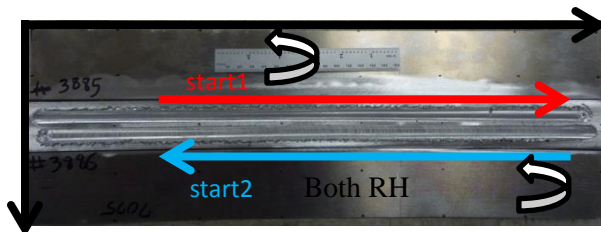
Picture of opposite welding direction with RH thread pin tool
